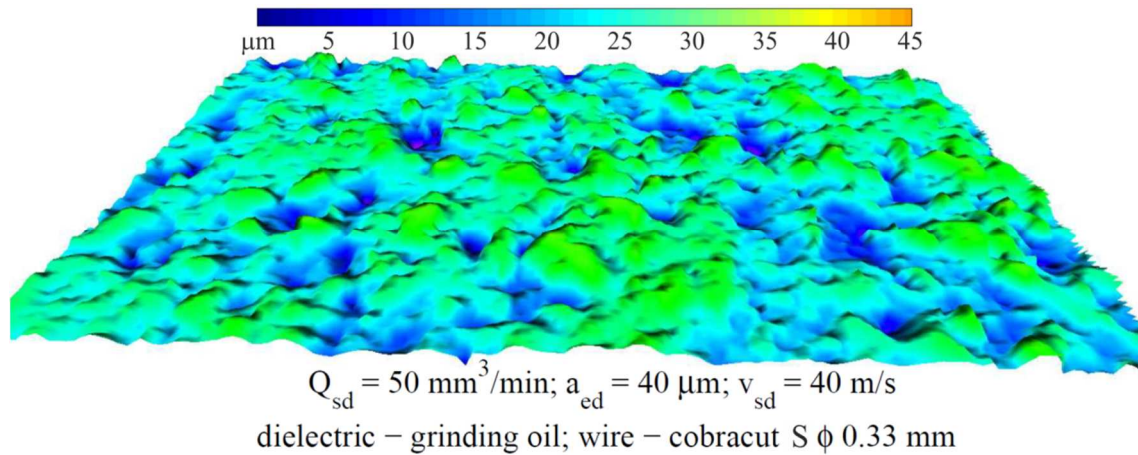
Surface topography of a WED-dressed metal bonded grinding wheel eroded using a discharge peak current of 188 A and discharge duration of 1.55  $\mu\text{s}$
